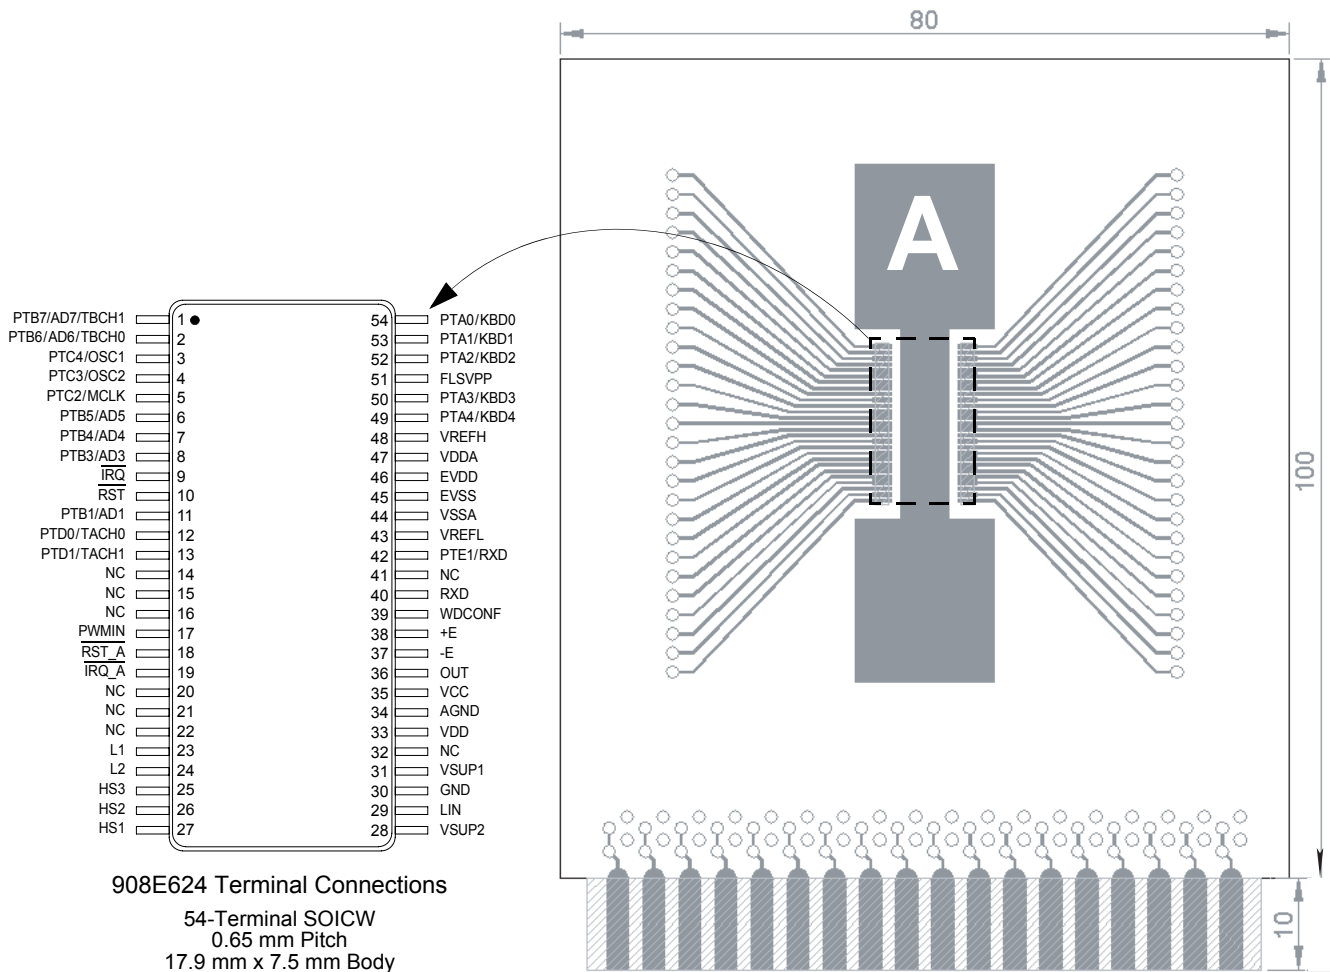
Surface Mount for SOIC Wide Body non-Exposed Pad
